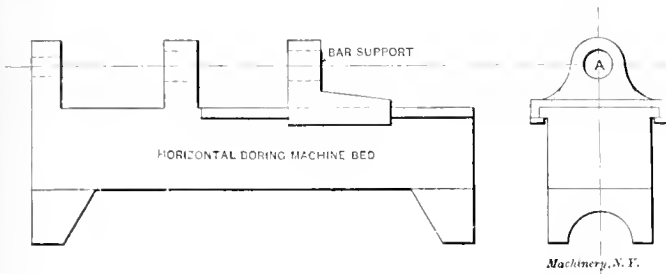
A Case where some Machine Work is done after the Work is partly assembled
